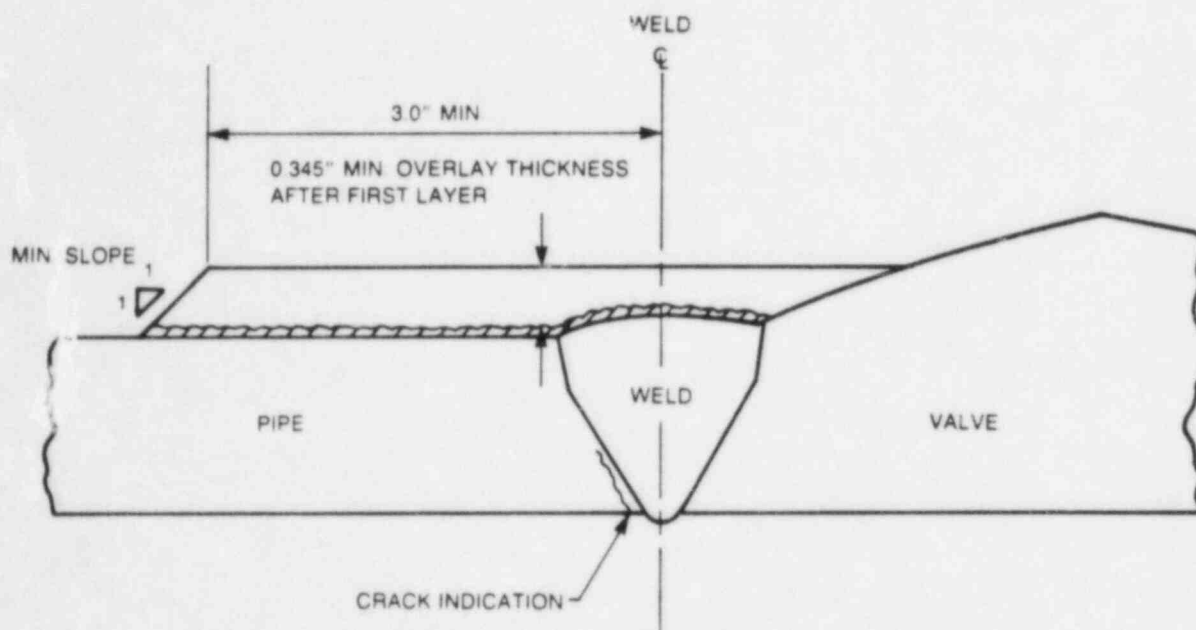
Weld Overlay Design for Weld 10-IB-11
